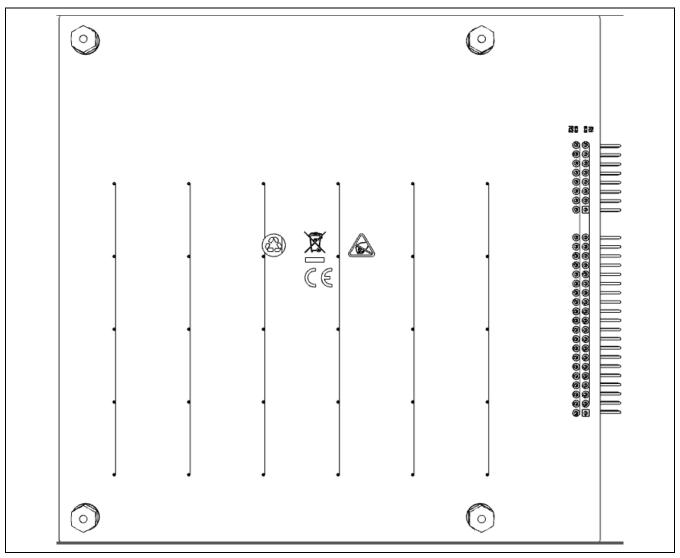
AE-CAP1-SC Touch Application Board Overall Component Placement, Bottom
